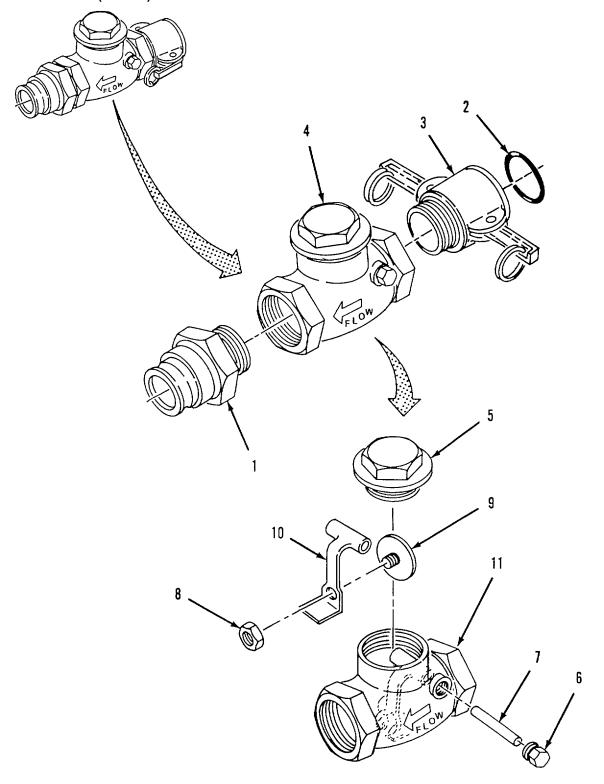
Check Valve Assembly (2-inch) Repair.
